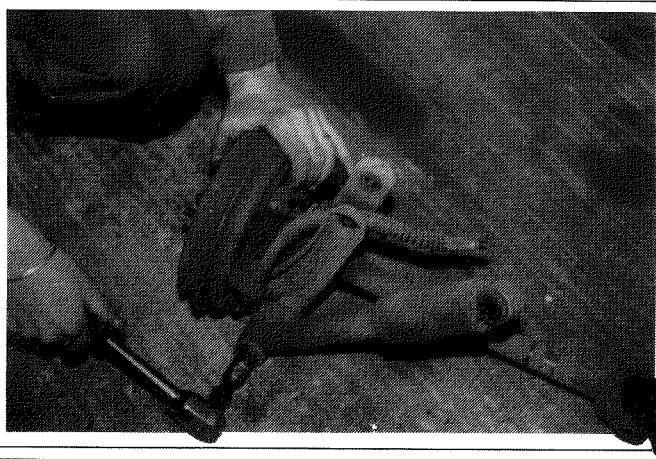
With the bolt and shocker removed you should now be able to rock the vertical link free from the trunnion housing. Remove the brake hose using two spanners. Be carefull not to shear or bend the hose bracket when doing this.
